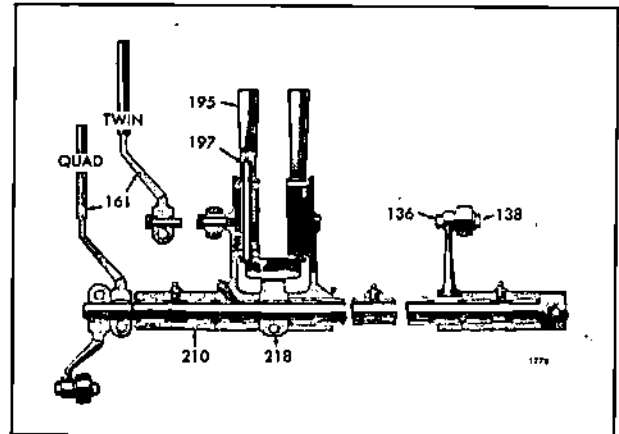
Throttle Control Cross Shaft Assembly—Twin and Quad Units
